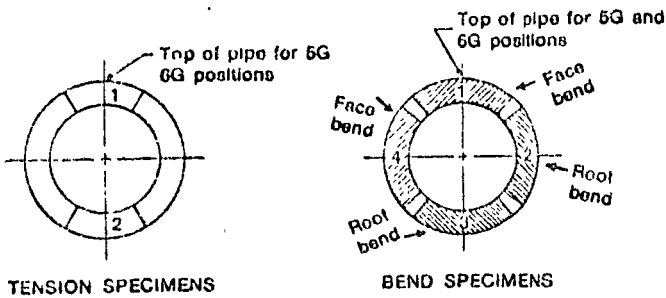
Location of test specimens on welded test pipe—2 in. or 3 in. in diameter.
